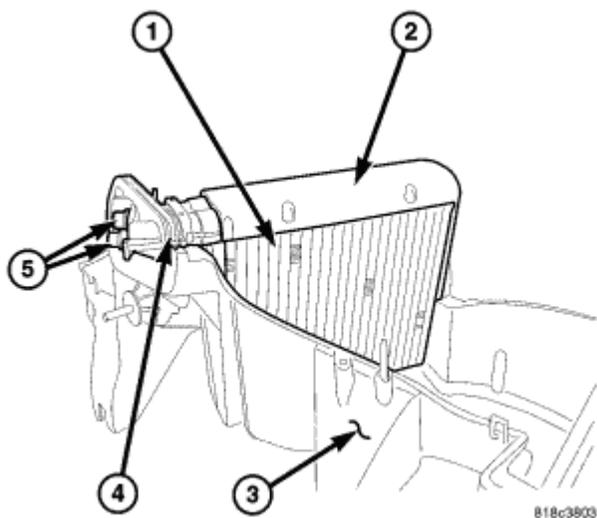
A/C Evaporator, Foam Insulator, HVAC Housing, Rubber Seal & Tapping Block
